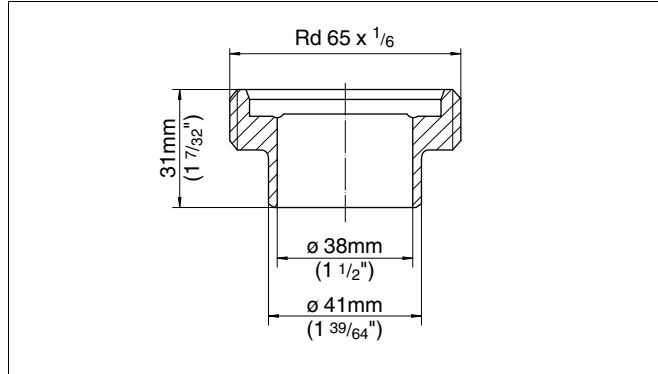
Dimensions welded socket DN 40 acc. to DIN 11864-1
